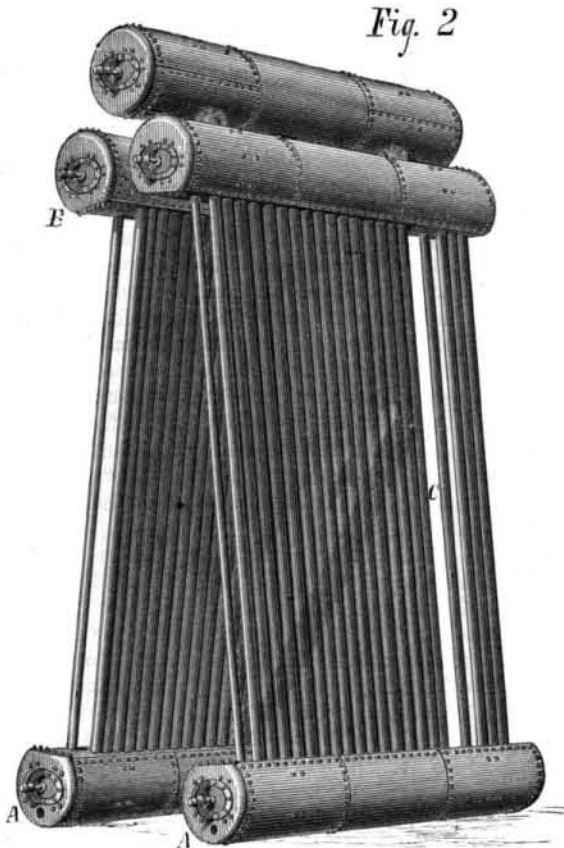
THE FIRMENICH SAFETY STEAM BOILER.
